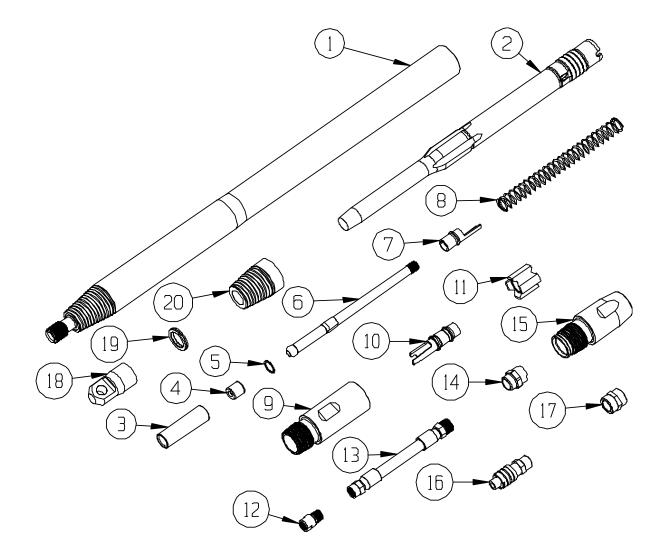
Typical Hole-Hog Assembly (Threaded Anvil/Body)
